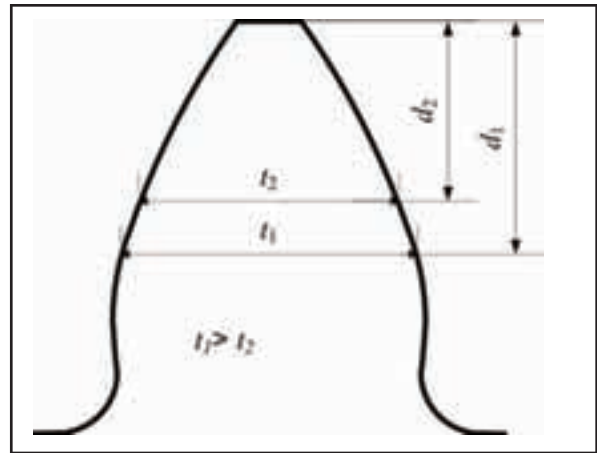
Like spur or helical gears, bevel gears have a tooth thickness taper in the tooth depth direction.
